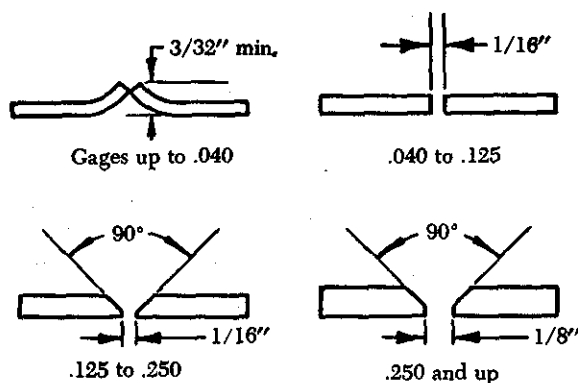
Preparation of edges for welding magnesium sheet.
